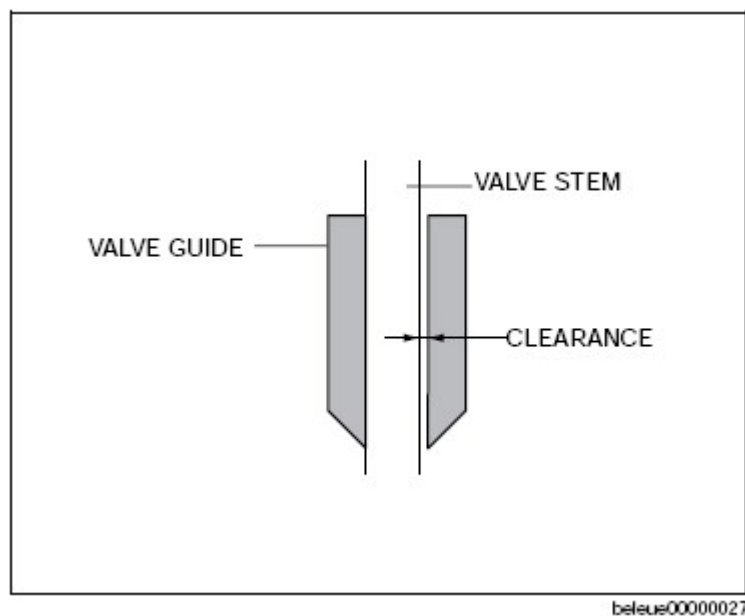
Inspecting Clearance Between Valve Stem And Guide
